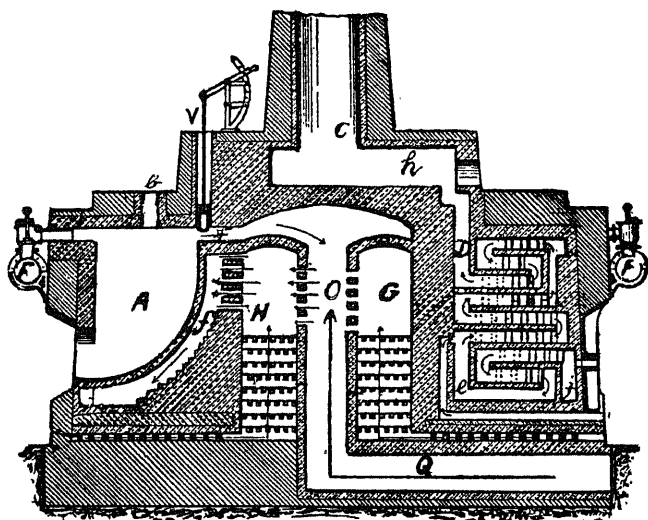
Vertical Section of "Bauer" Vertical Oven.
